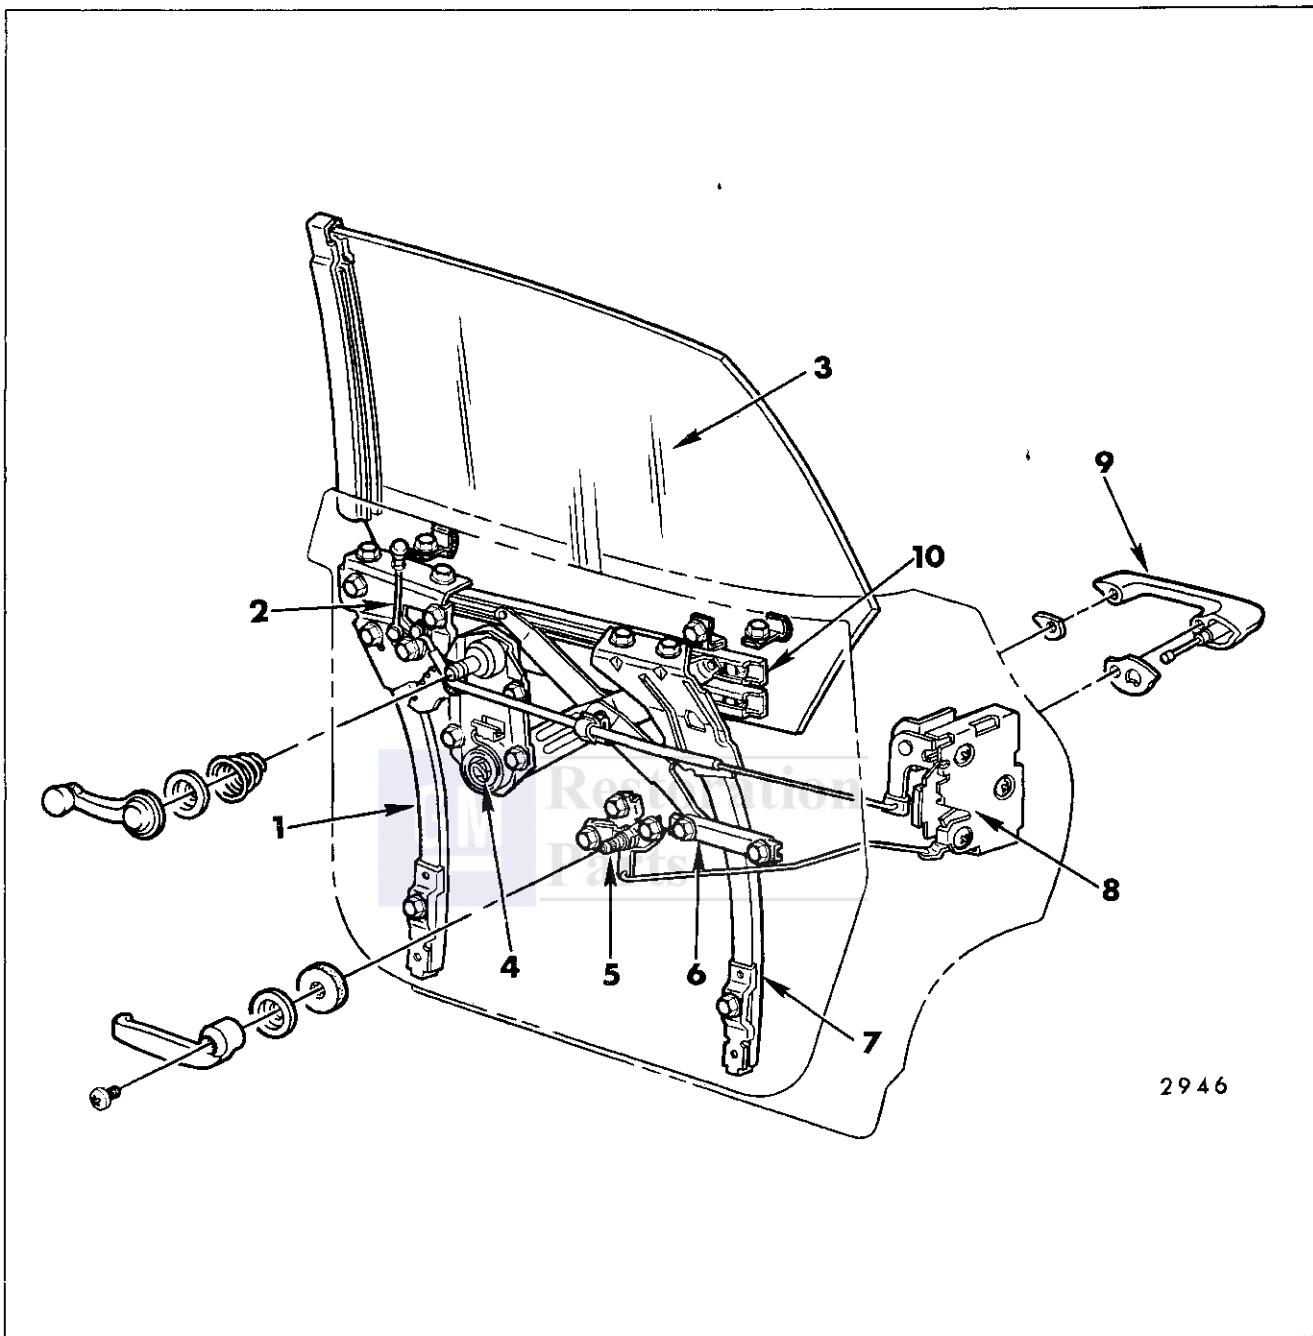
Rear Door Hardware - "A-39" Styles
